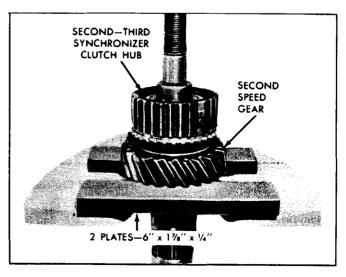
A-26 Removing 2nd & 3rd Speed Synchronizer Clutch Hub and 2nd Speed Gear
